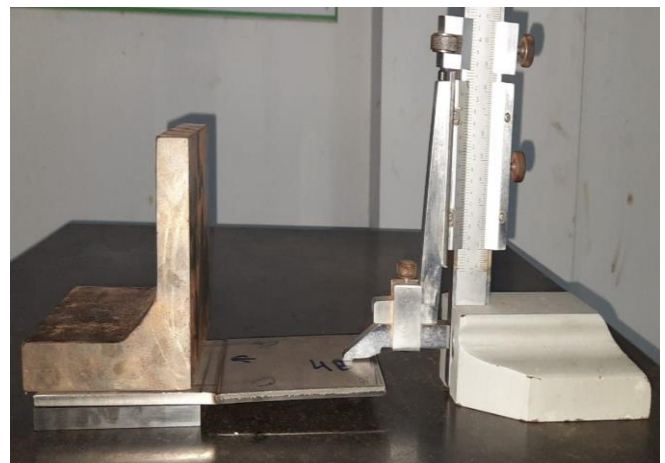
Measurement of distortion in the final welds using vernier height gauge
